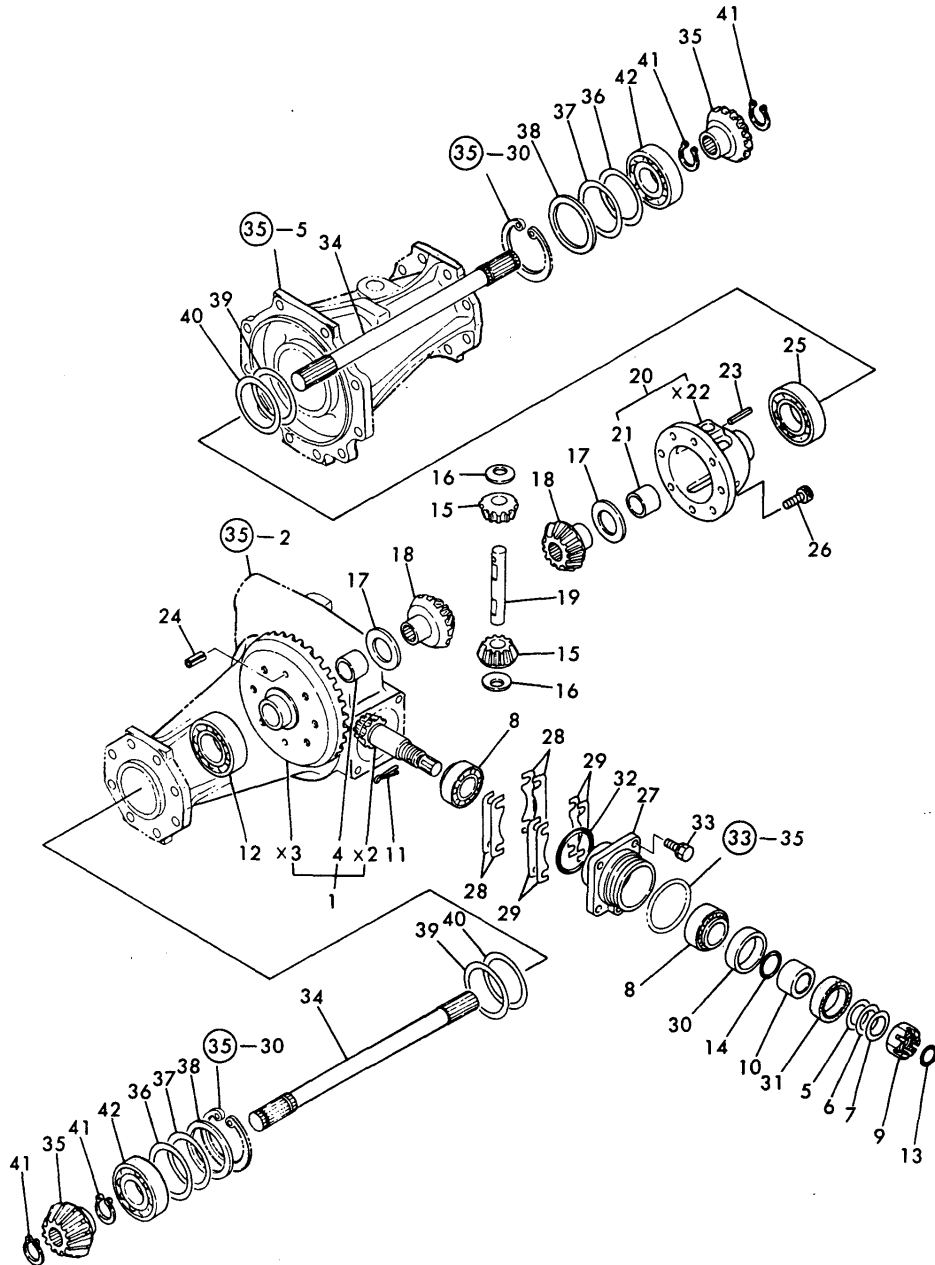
PROPELLER SHAFT OF FRONT AXLE [For Model YM226D]
